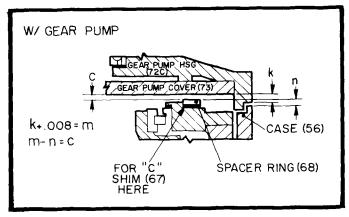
Slideblock End Clearance W/Gear Pump. (508644).
